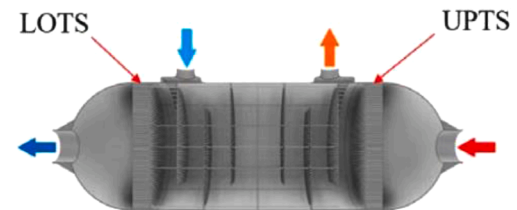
Position of the tube-sheets (LOTS=Lower tube sheet, UPTS=Upper tube sheet).
